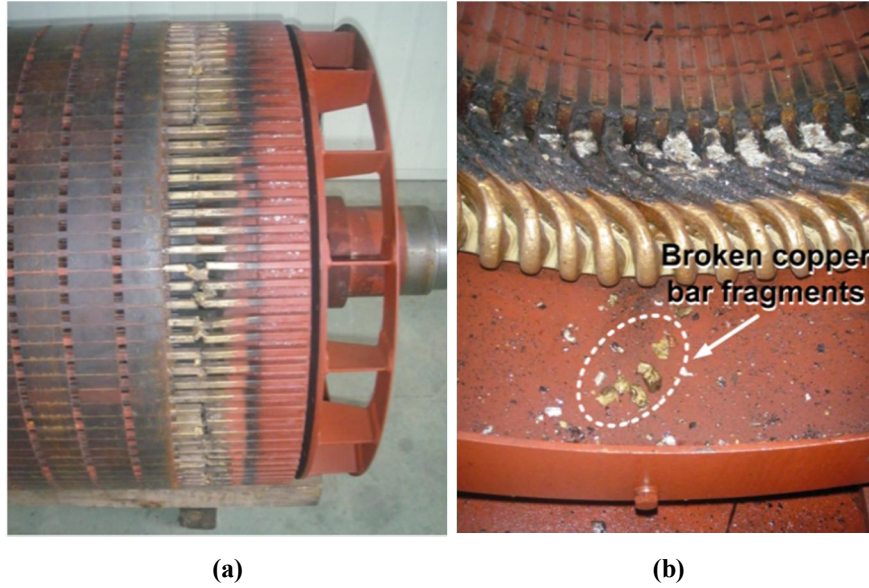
Example of 3.3 kV, 800kW double cage induction motor failure due to outer cage damage: (a) outer bar damage, (b) stator end-winding insulation failure due to broken copper fragments from outer bar
